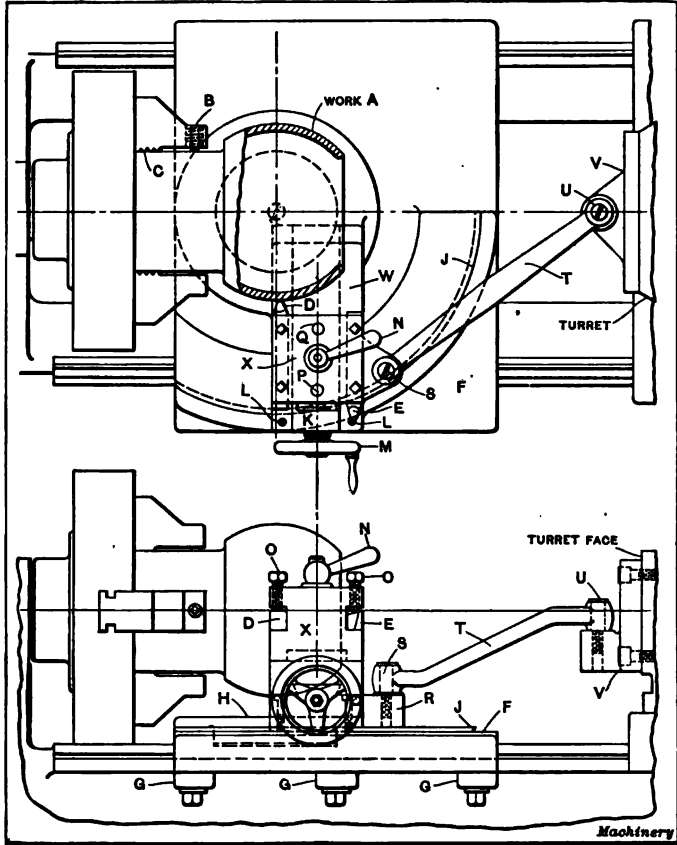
Spherical Turning Device for Horizontal Turret Lathe
